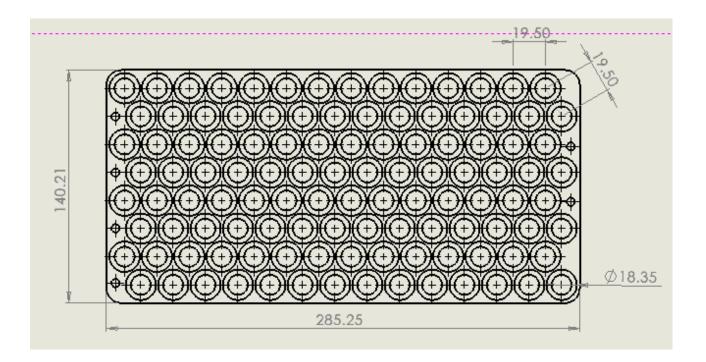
Cell holder drawing with cell to cell distance of 19.5 mm
